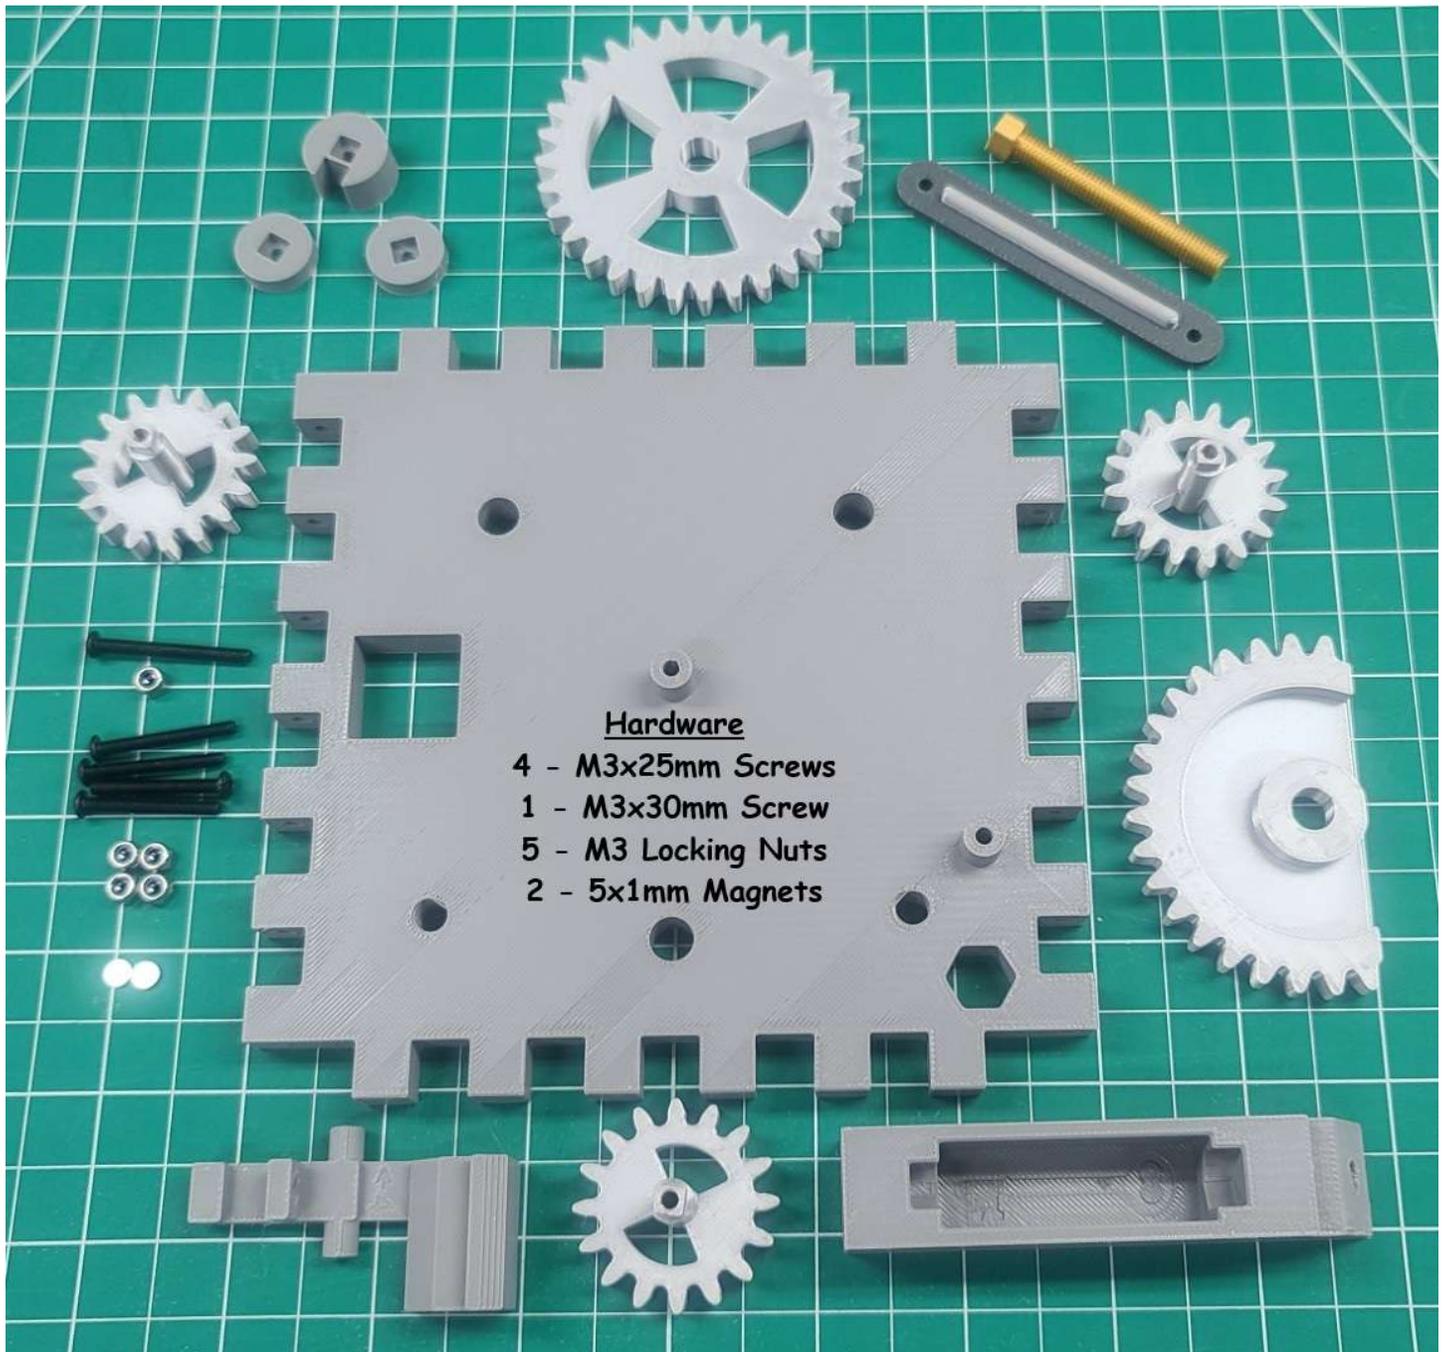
Side 4 Printed Parts and Misc. Hardware
